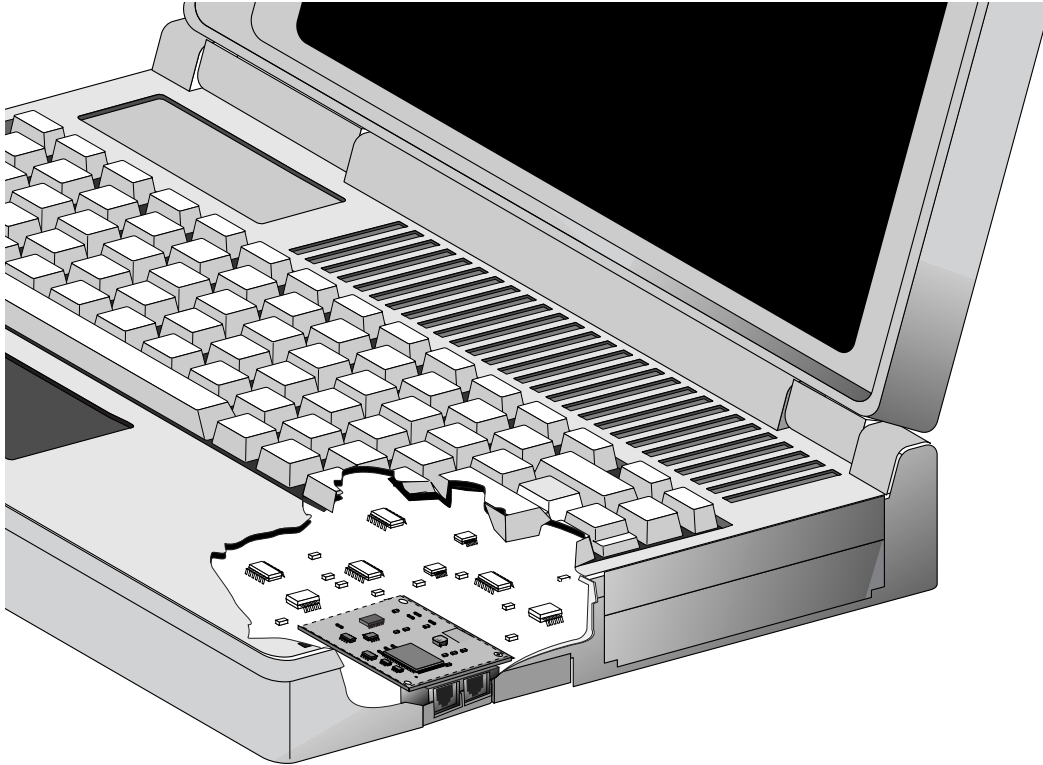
Type II Mini PCI Card (Sample Installation)
